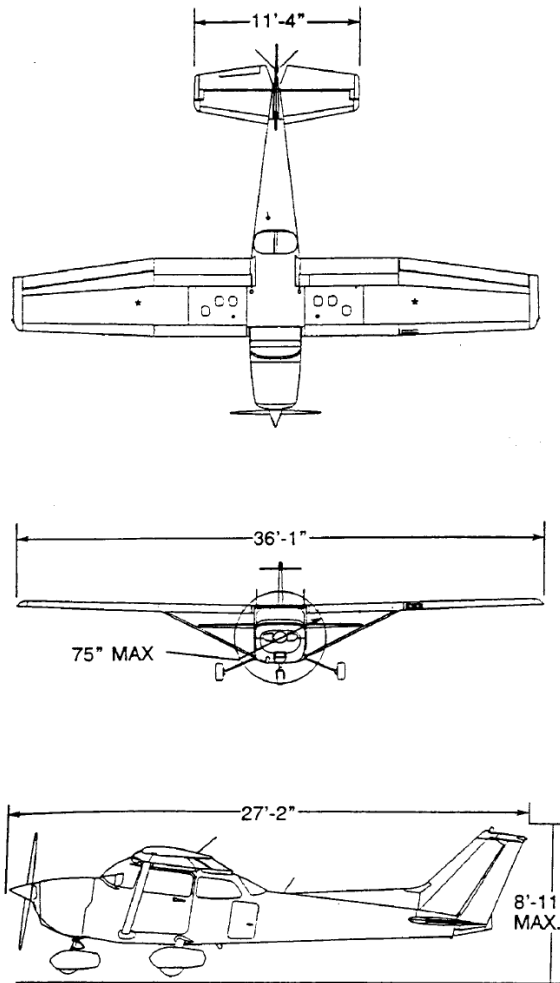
Cessna 172R aircraft three-view drawing, [3].
